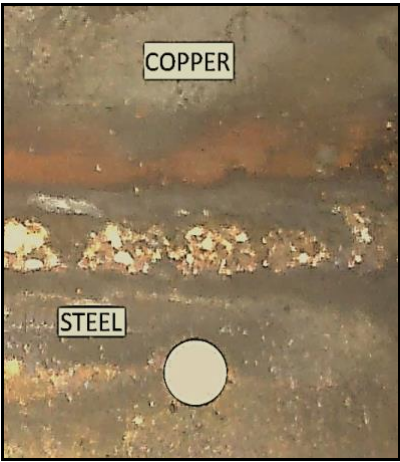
A weld between copper and steel used in parts of a metallurgical crystallizer
